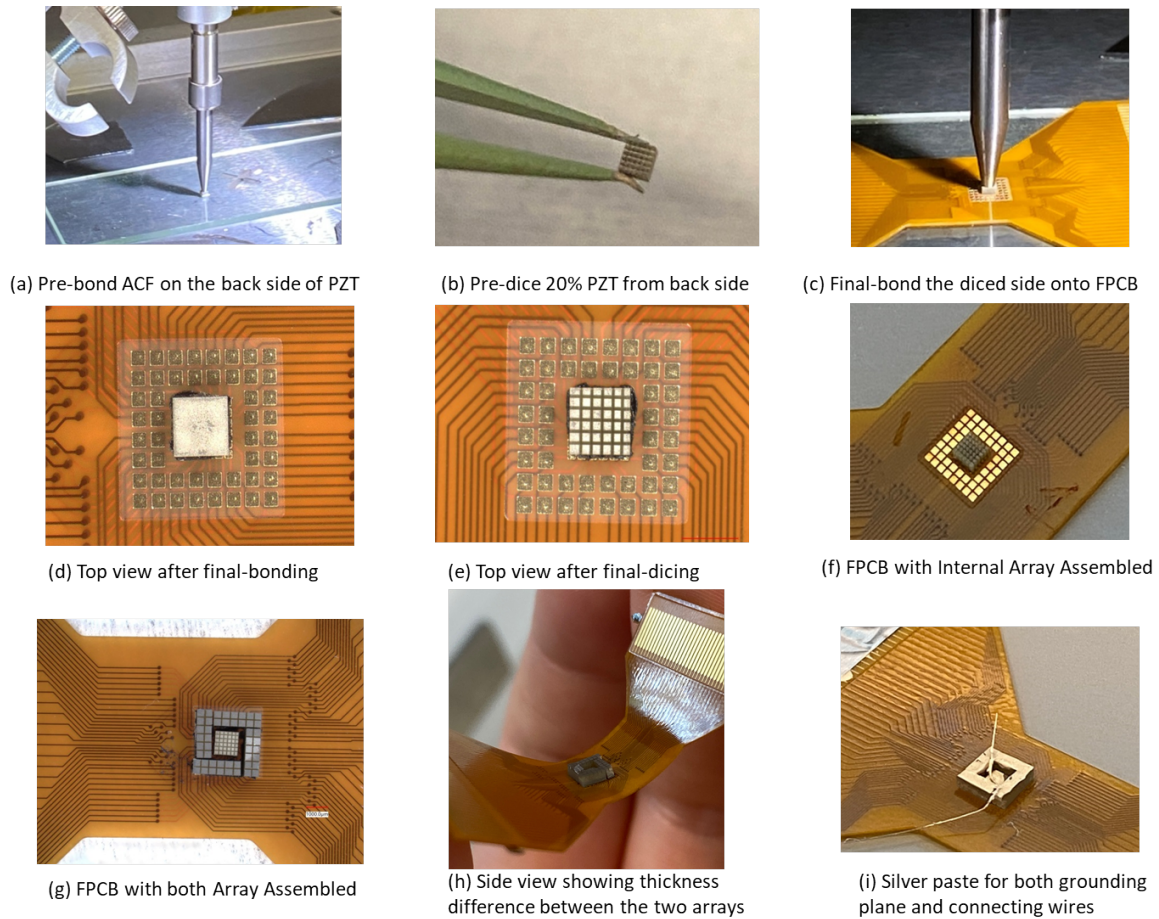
FPCB Fabrication and Assembly Process Flow
